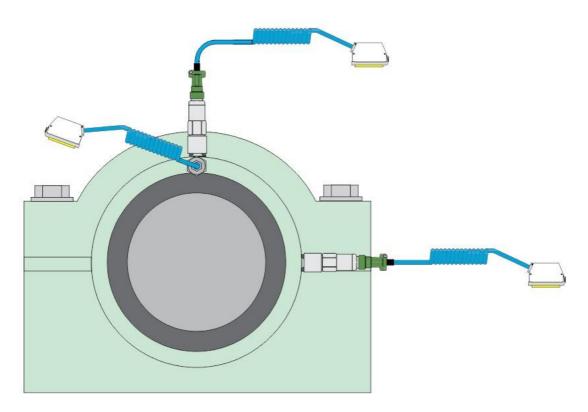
Illustrative solution of sensor placement on bearing element [68].
